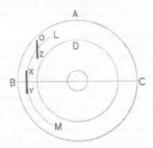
Sketch Showing Position of Drills in Ordinary Holder.
